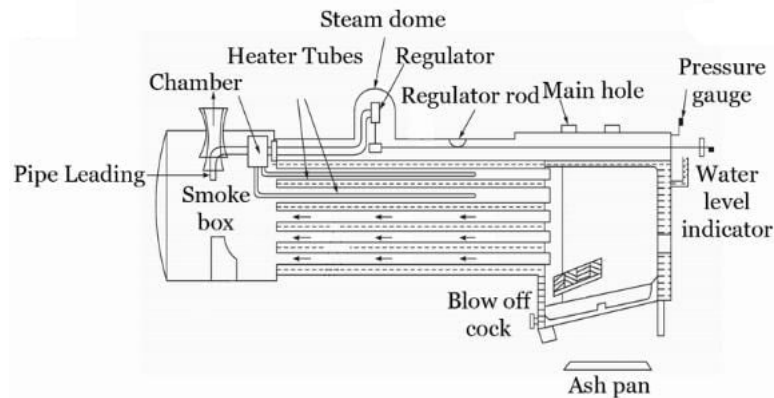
Diagram showing the structure of the locomotive boiler [The Mechanical Engineering].
